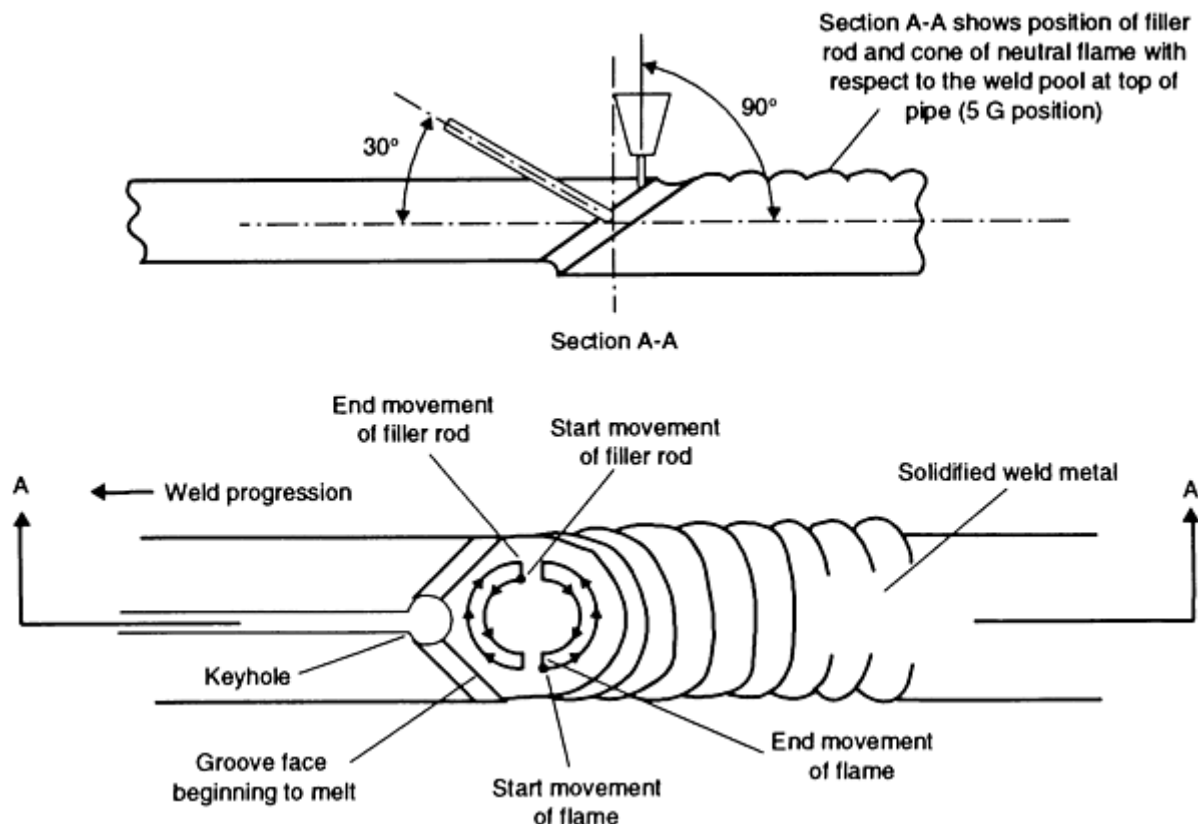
ORIENTATION AND MOTION OF TORCH RELATIVE TO WORKPIECE IN ONE-PASS FOREHAND OXYACETYLENE WELDING. THE CONE OF FLAME SHOULD BE KEPT CLOSE TO, BUT SHOULD NEVER TOUCH, THE WELD POOL OR PIPE GROOVE FACE. SOURCE: REF 5
